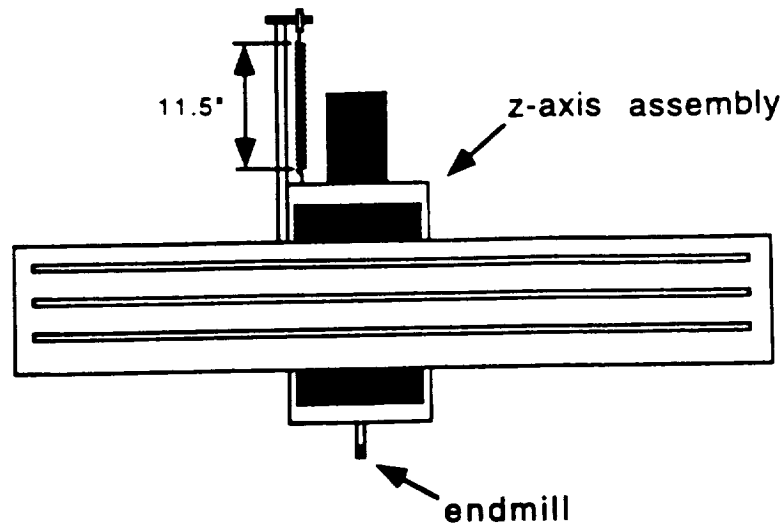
A load-bearing spring was installed on the z-axis to help support its weight.
